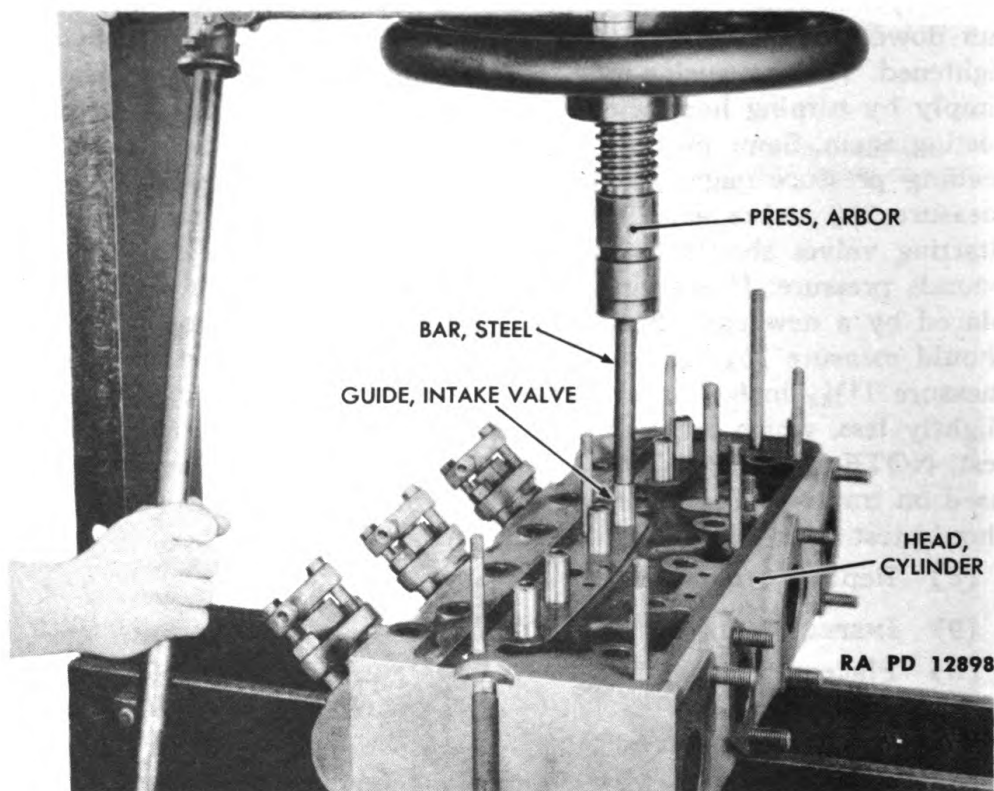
Pressing Intake Valve Guide into Cylinder Head
